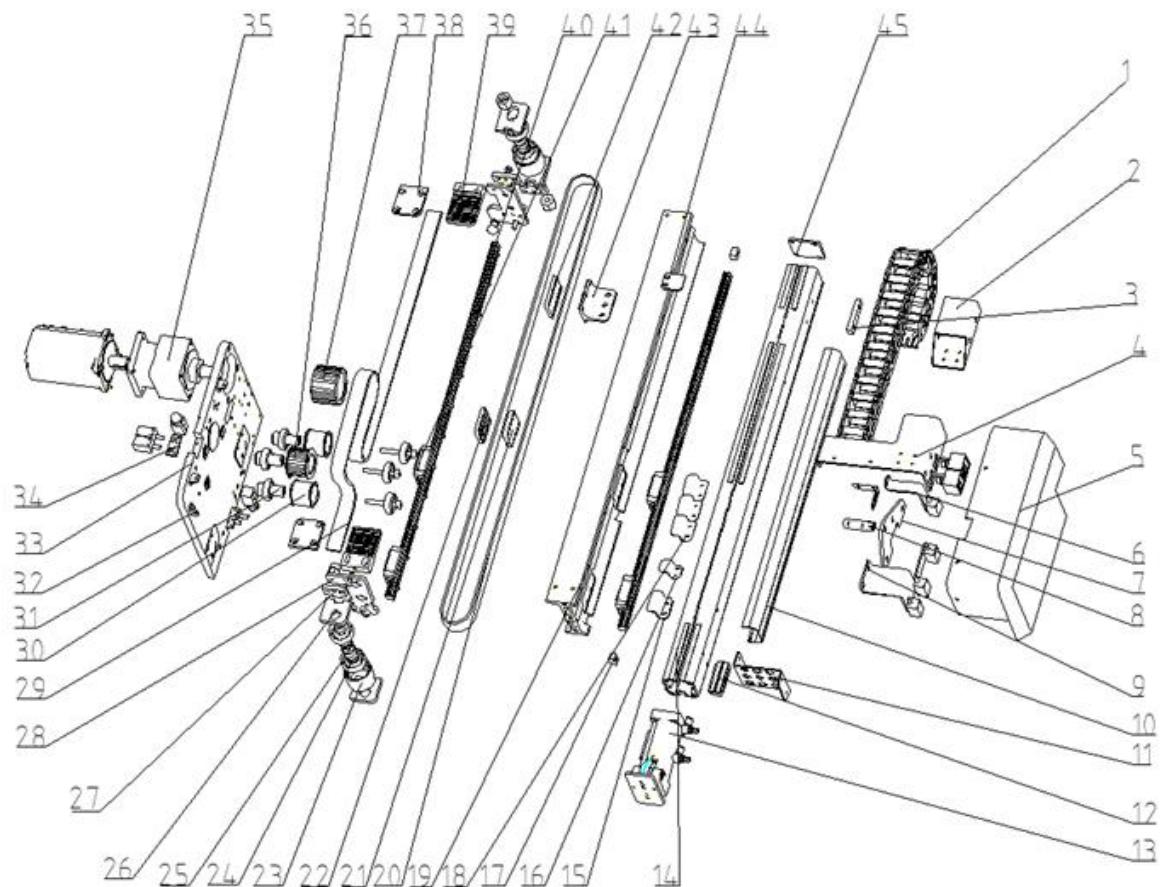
ST3-T Main-arm unit(telescopic arm) exploded view
